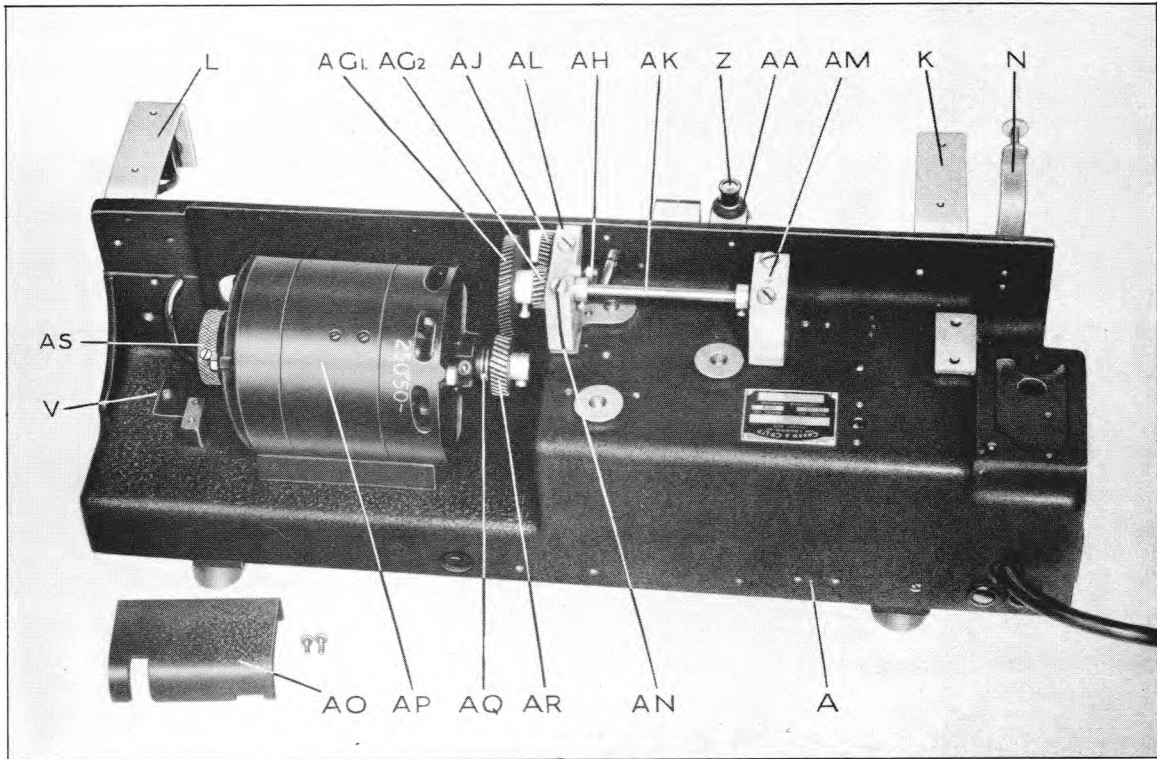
No. 7P MAIN BASE ASSEMBLY (FRONT VIEW)
